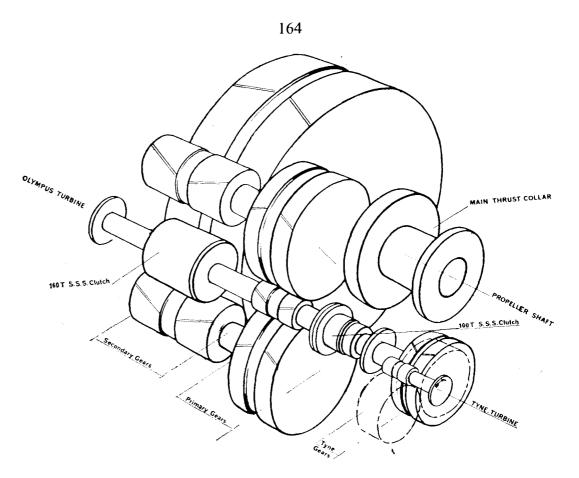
TYPE 42 GEARBOX DESIGN (Courtesy David Brown Gear Industries Ltd.)
